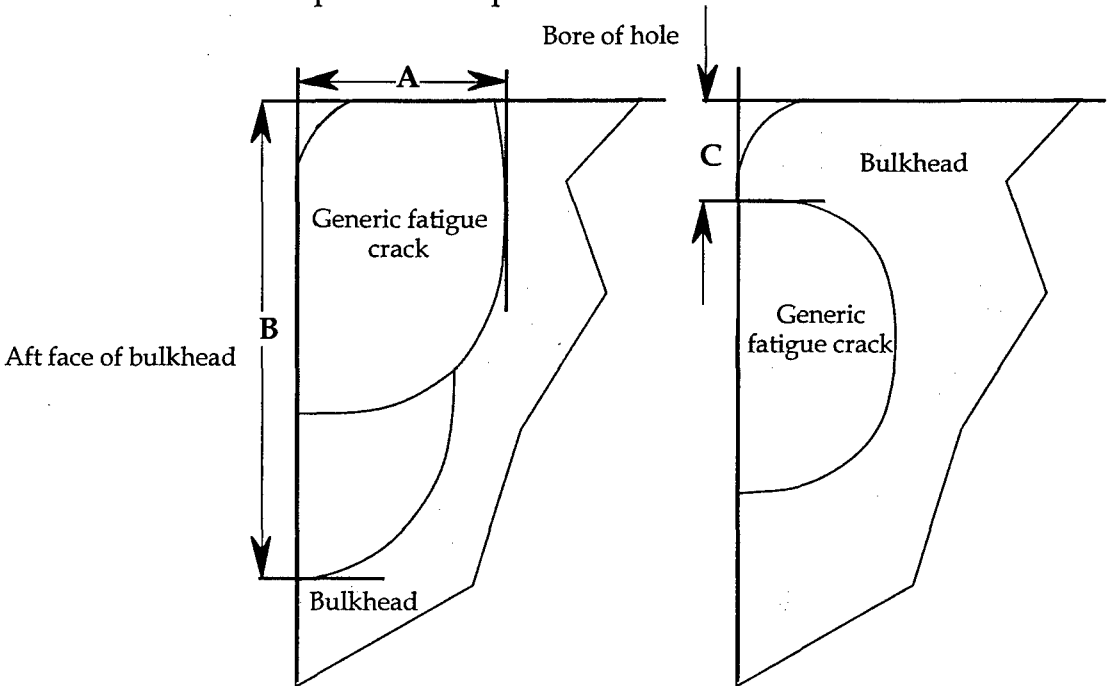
Schematics of the fatigue crack types showing the positions of the dimensions presented in Table 1
